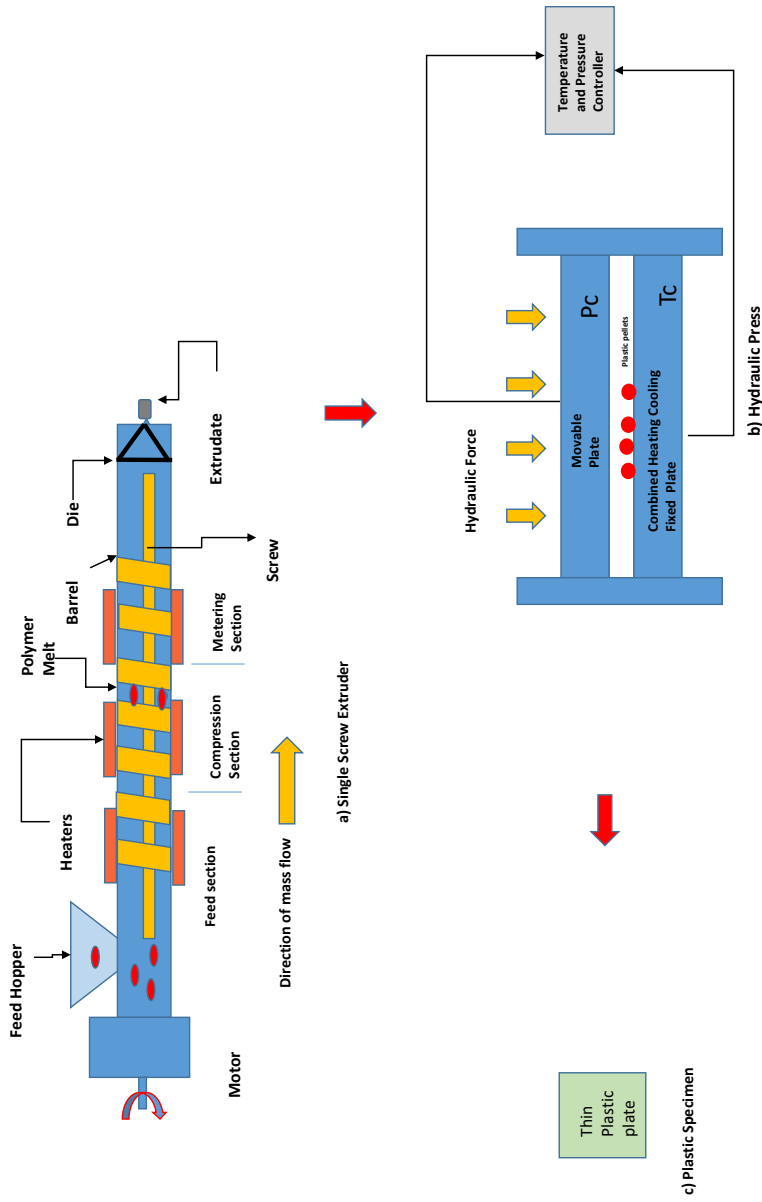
Schematic illustrating the screw extrusion and hot-pressing process for preparation of plastic specimens for testing in cone calorimeter a) Single screw extruder, b) Hydraulic press, c) Plastic specimen
